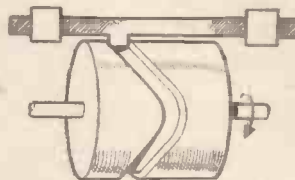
Drum cam for converting rotary motion into irregular reciprocating motion.
